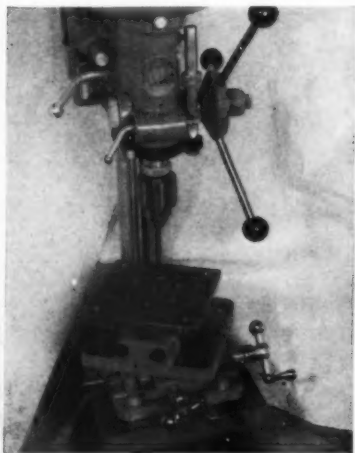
A universal compound vise added to a bench drill increases versatility. The bench drill then becomes an inexpensive precision unit for indexing holes.
